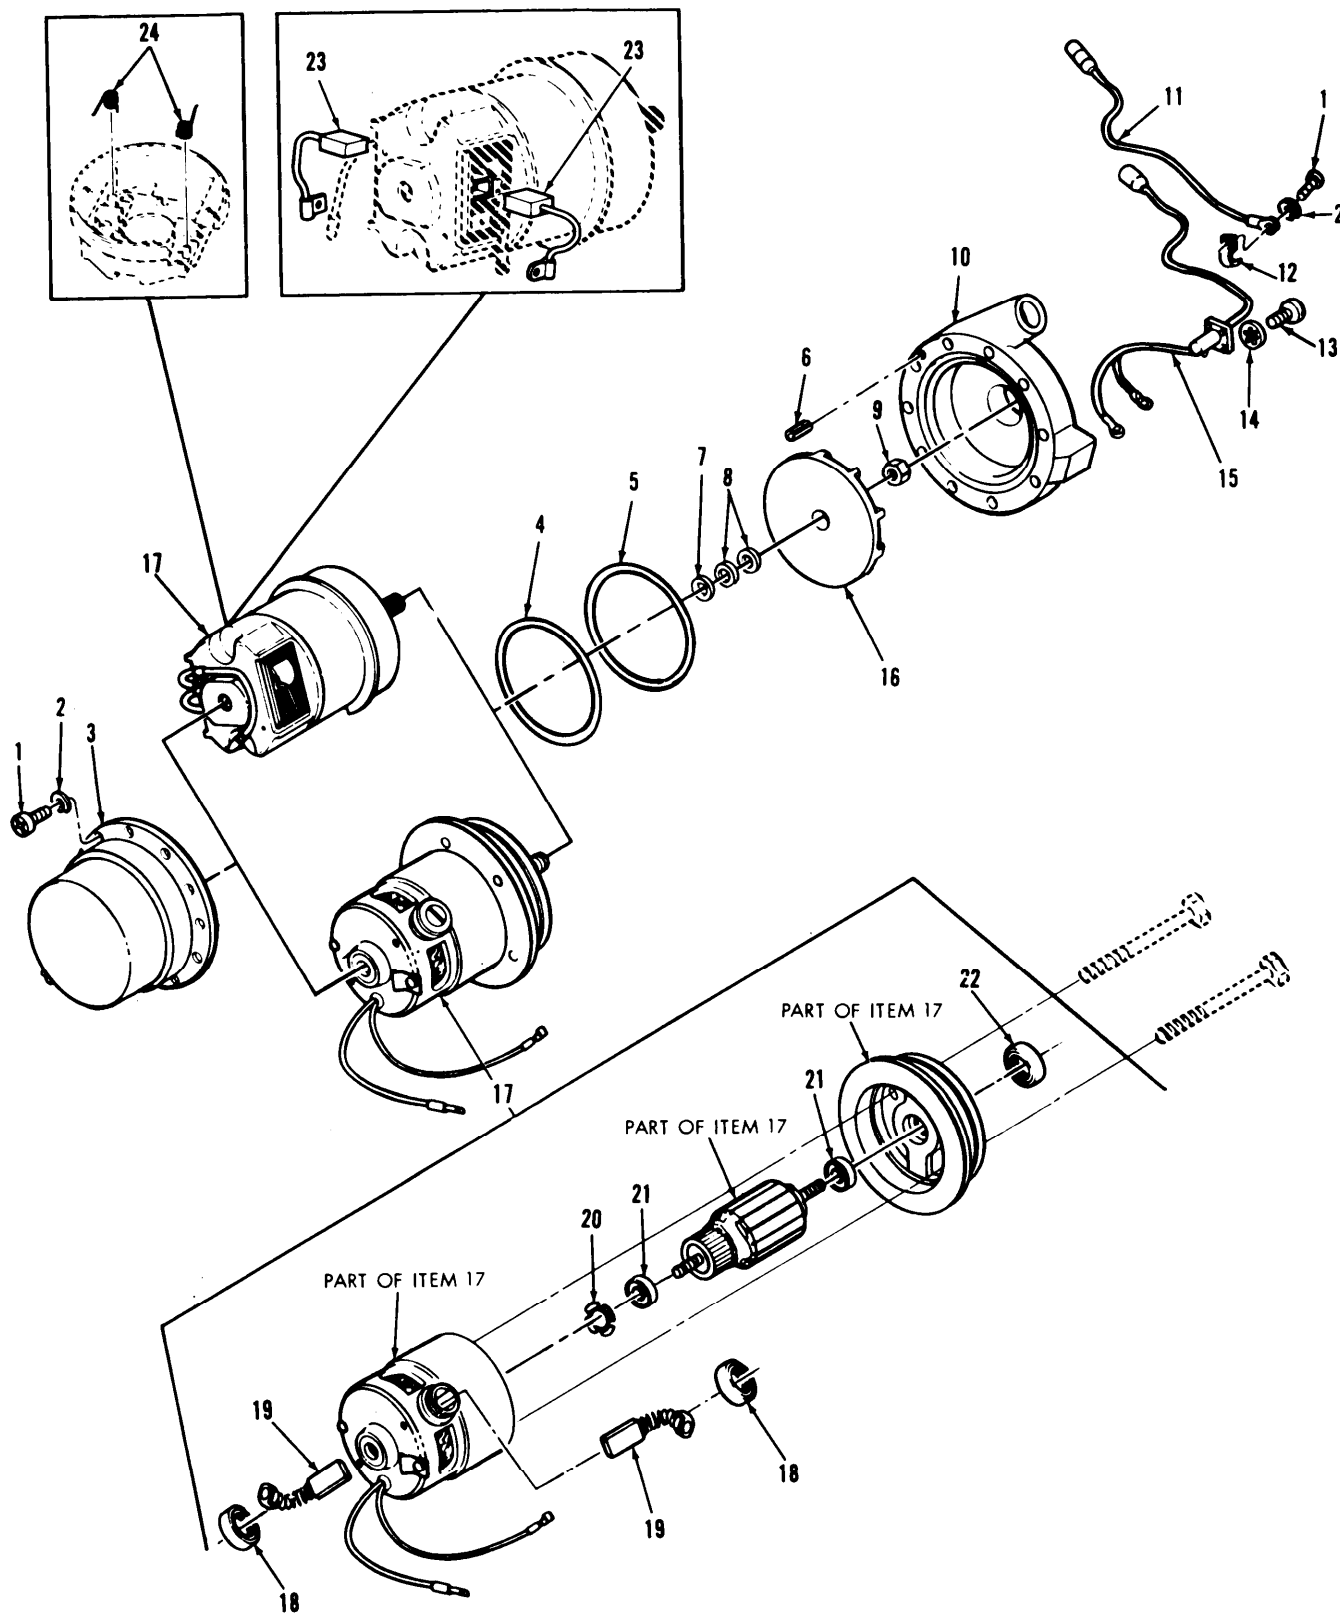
AIR CLEANER CENTRIFUGAL FAN ASSEMBLY.
